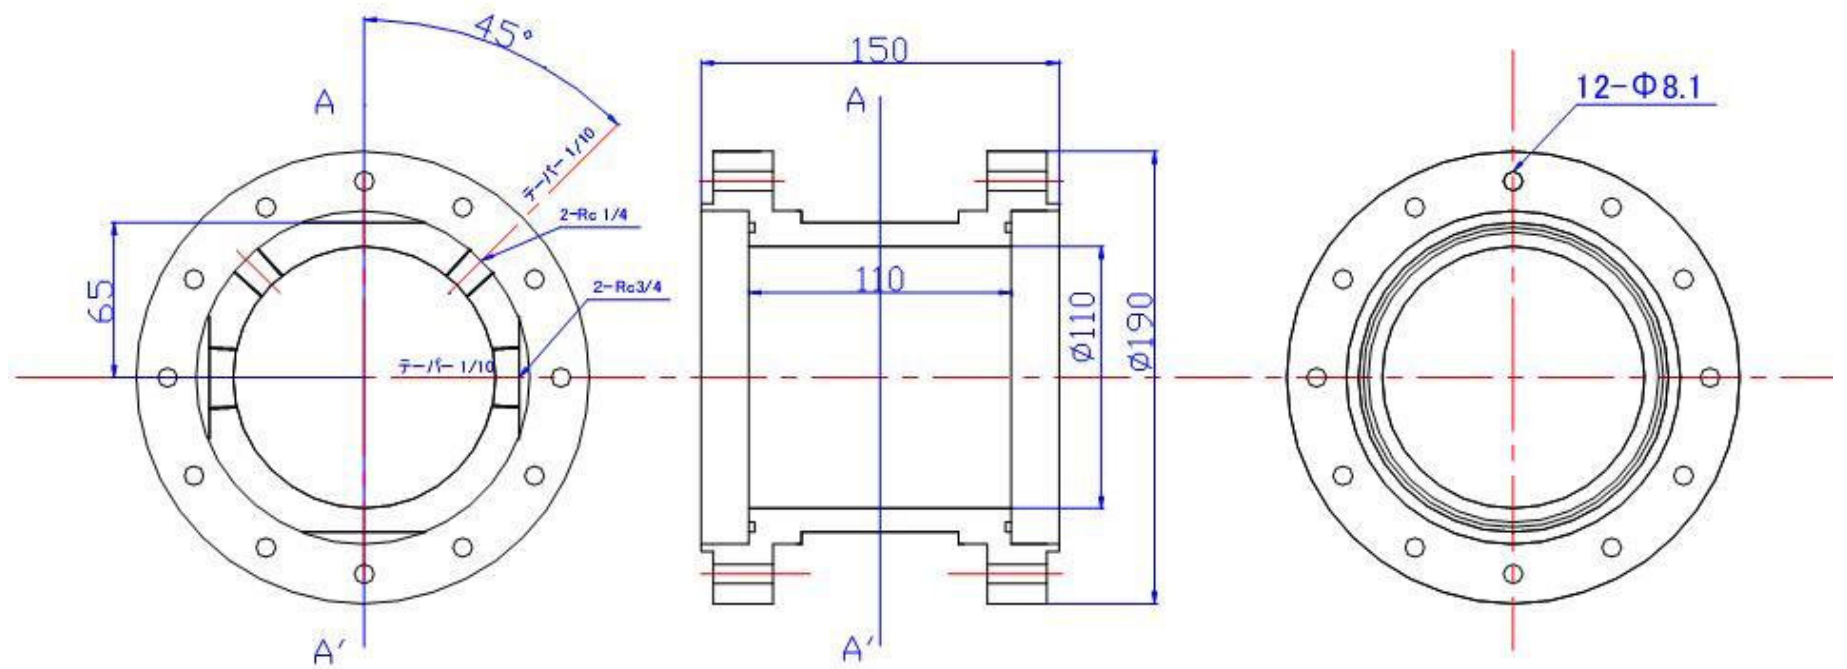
Manufacturing drawing of cylindrical combustion bomb (Front view)
